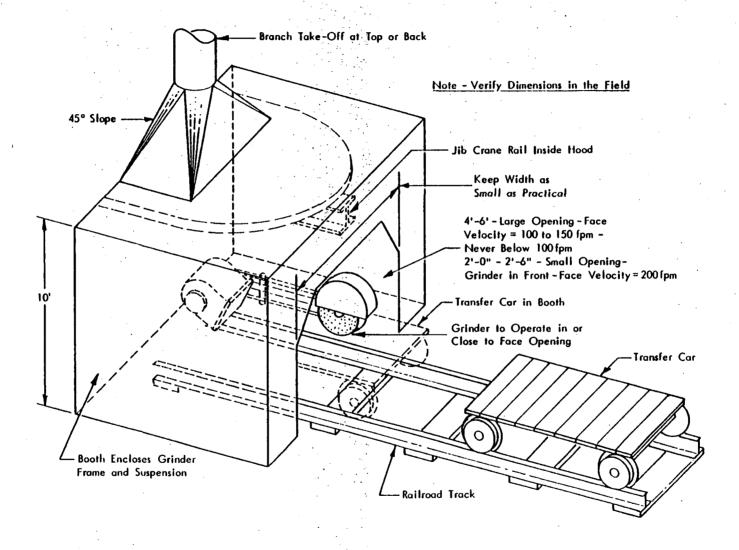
Swing frame grinder booth with transfer car. $\frac{50}{}$
